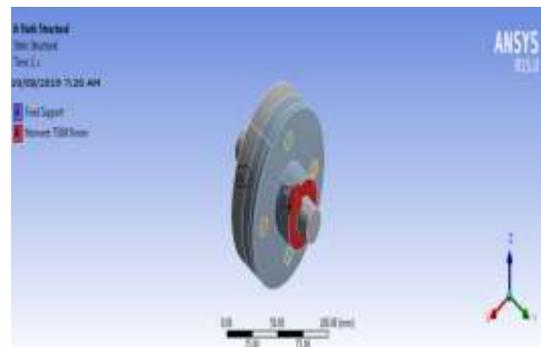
STEEL STATIC STRUCTURAL FLANGE COUPLING
